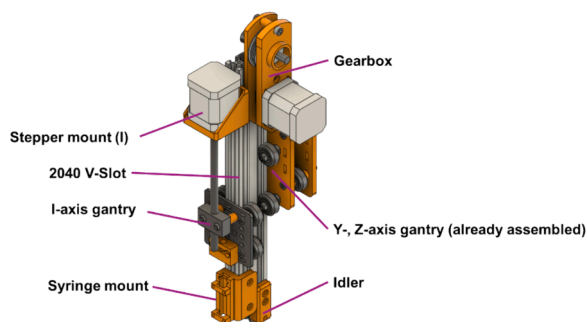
CAD model of the assembled I-, Z-axis. Note that several parts were omitted, including screws, pulleys and belts.
